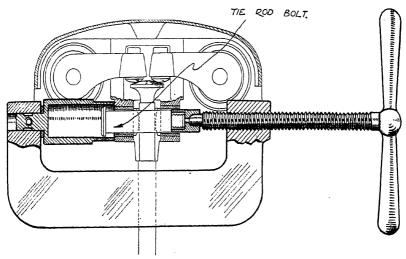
Extracting tie rod bolt from front end of rocker bracket.
